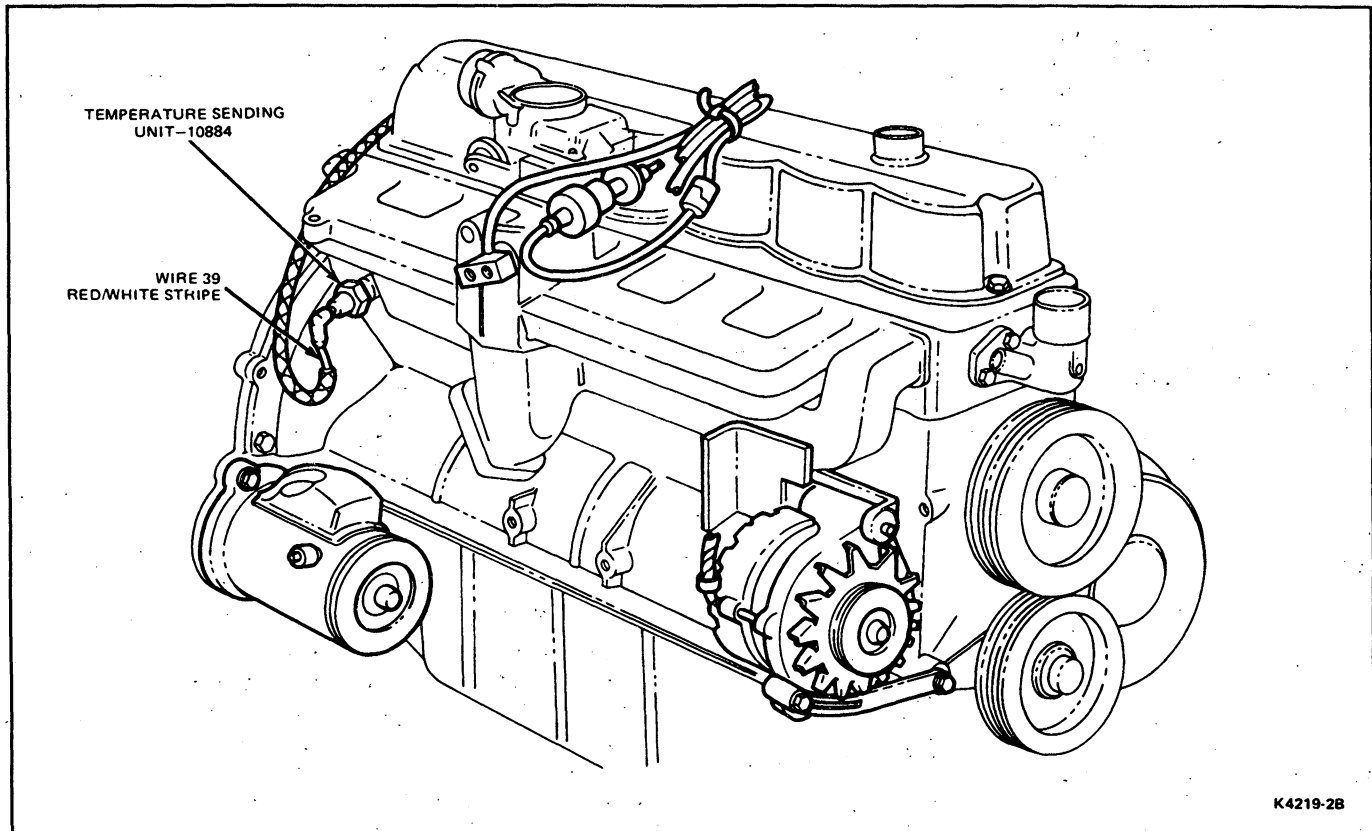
Temperature Sending Unit—6 Cylinder—E-150—E-350 Shown, F-150—F-350, F-Super Duty and Bronco Similar
